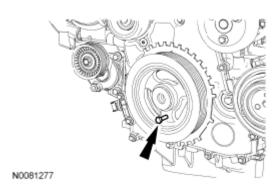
Locating Crankshaft Pulley And Crankshaft Courtesy of FORD MOTOR CO.
